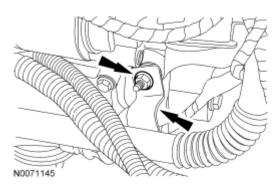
Locating Power Steering Tubes And Wiring Harness Courtesy of FORD MOTOR CO.
